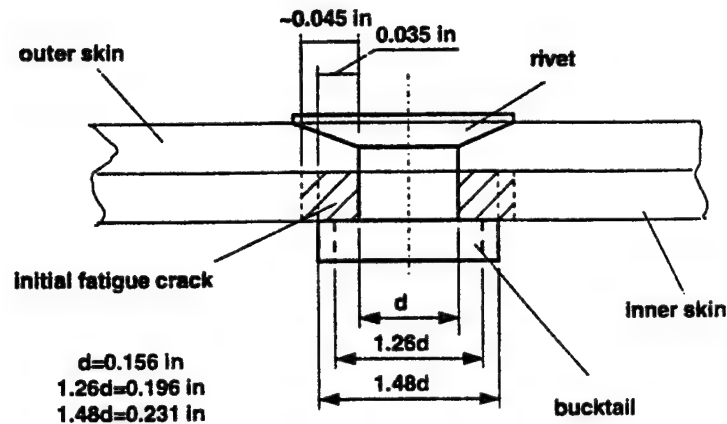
Initial Fatigue Crack in the inner skin
